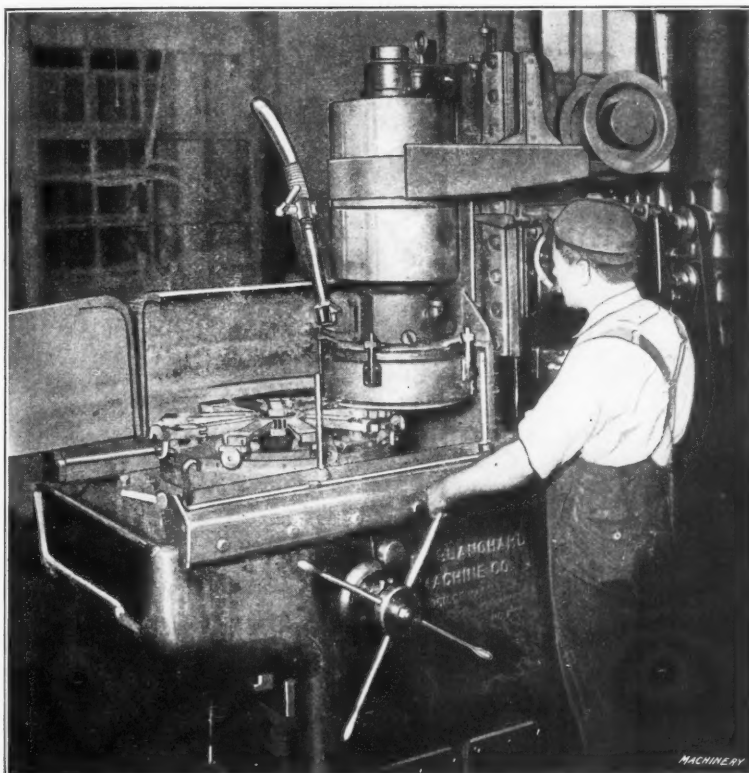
Facing Forgings on a Vertical Surface Grinder
